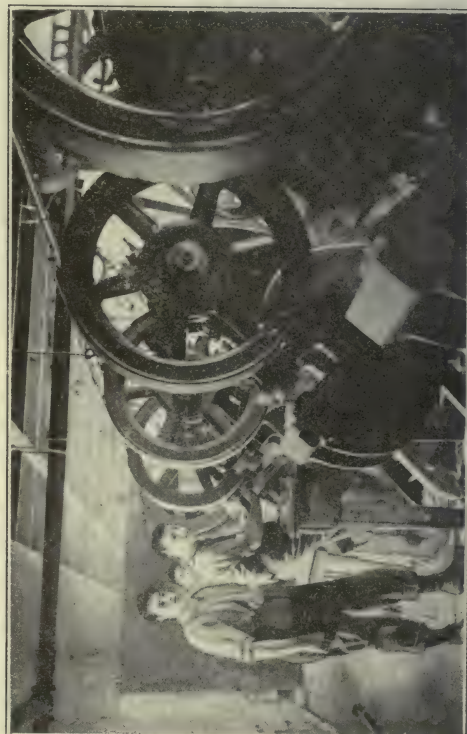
Stamping Machines used to Manufacture the Cans in Which Sardines are Packed.
